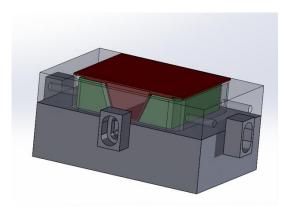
Image of the Inverted Specimen Inside the Modified Mold.
